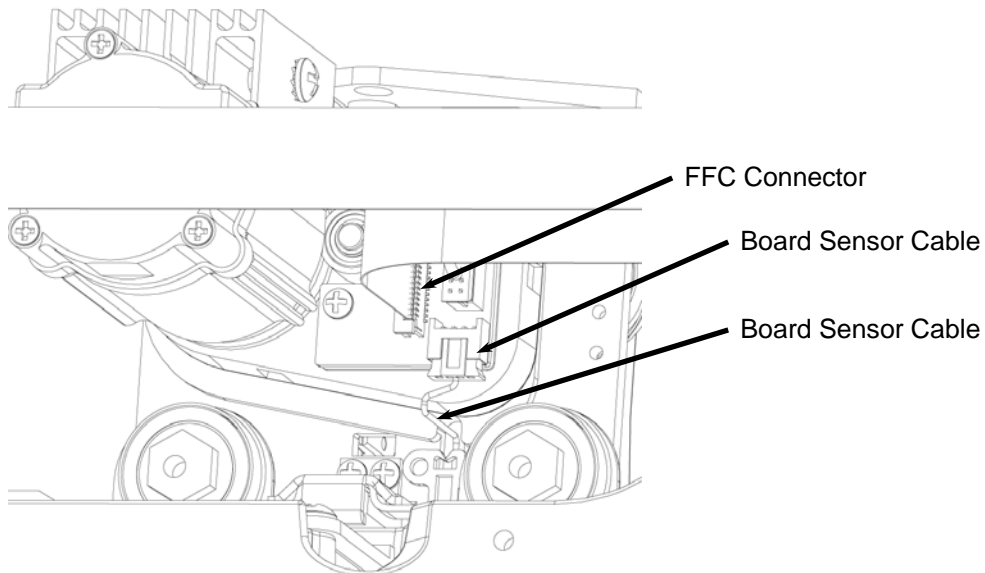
VIEW OF THE BACK OF THE Z-MOTOR PACK
